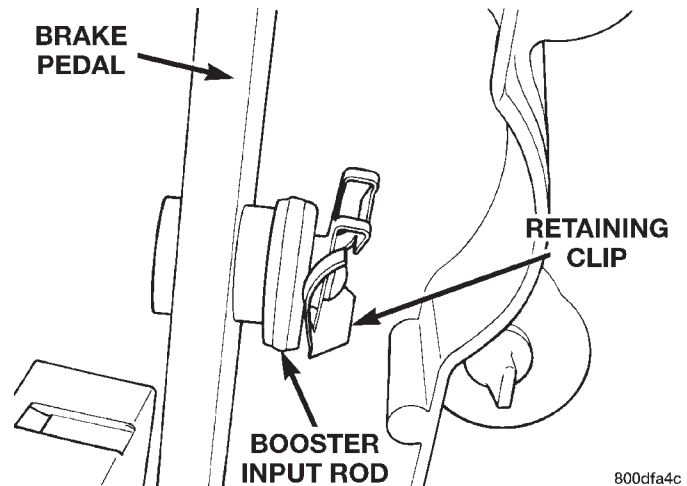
Retaining Pin Installed On Brake Pedal Pin
